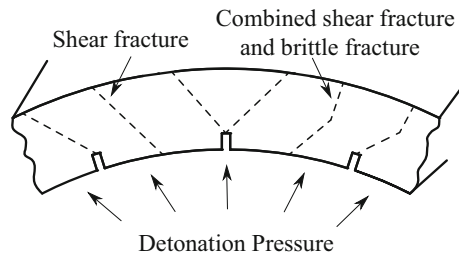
Schematic of crack types of notched exploded cylinders in the experiments
